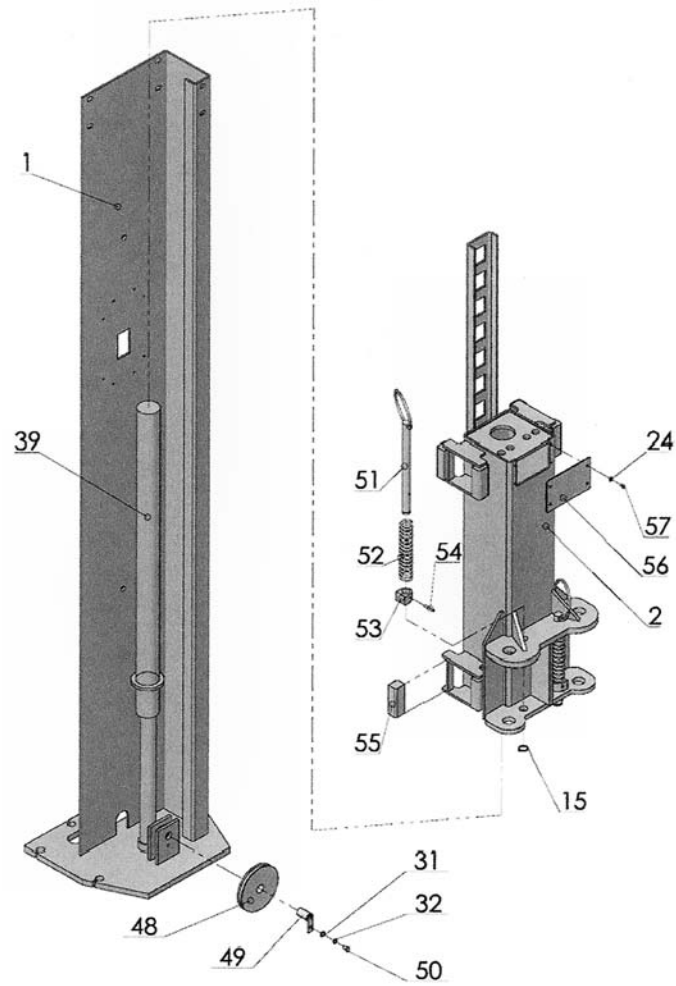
Illustrated Parts Breakdown – Sheet 2 of 6
